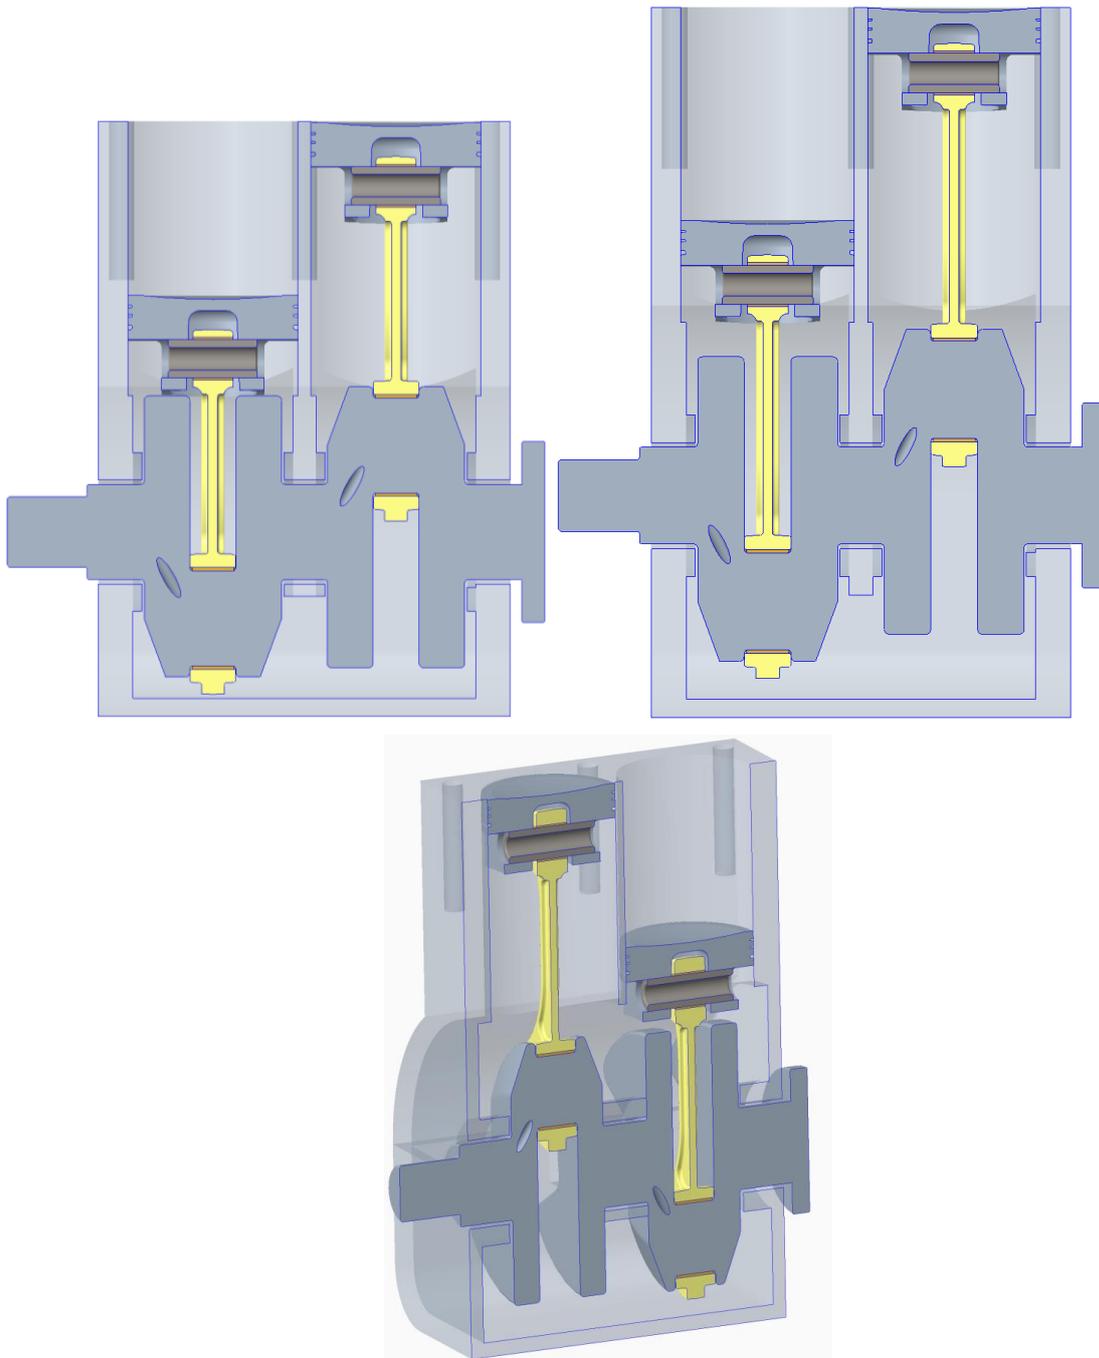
Illustration of parametric 3D CAD model of twin-cylinder engine (82)
